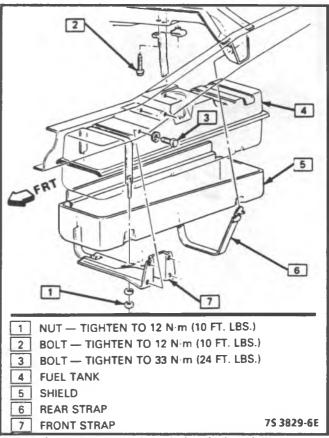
Fuel Tank (C/K) Chassis Cab
